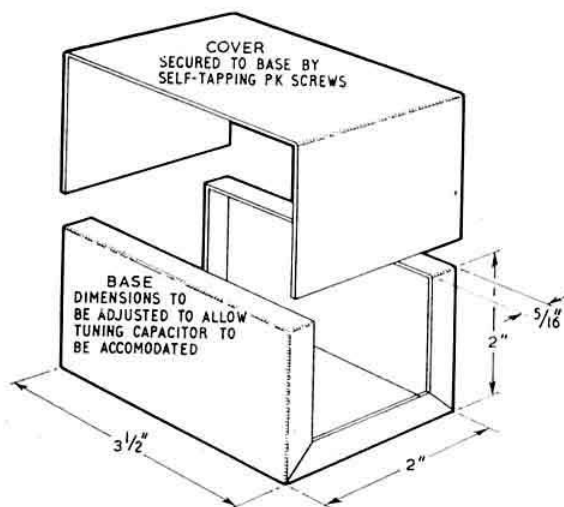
General construction of oscillator chassis/box assembly. To be secured to the main chassis by PK screws. Clearance hole to be cut in chassis to allow passage of leads from oscillator. Ventilation holes $\frac{1}{4}$ in. diameter to be drilled in main chassis directly under oscillator valve position. Material: 16 s.w.g. or 18 s.w.g. aluminium.
